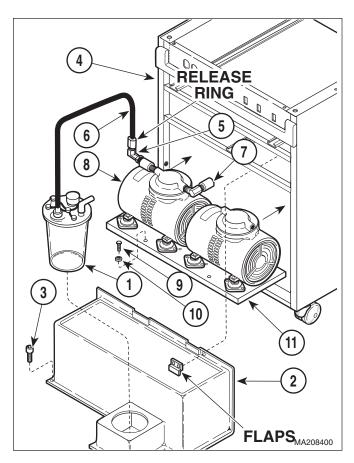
Disconnecting / Connecting Pressure Pump Assembly
